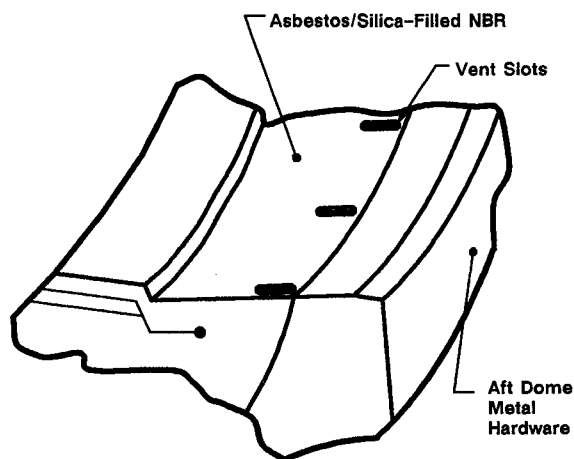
Case-to-nozzle joint-wiper vent slots.
